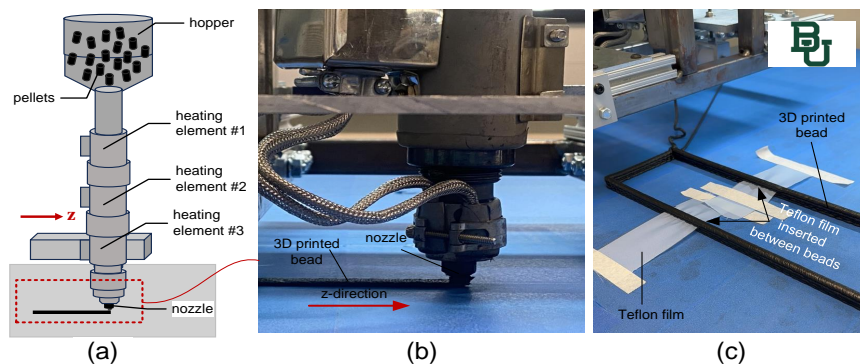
3D printing process using large area additive manufacturing machine: (a) schematic representation of extrusion process, (b) actual extrusion process, (c) insertion of Teflon film between beads to create an initial crack.
